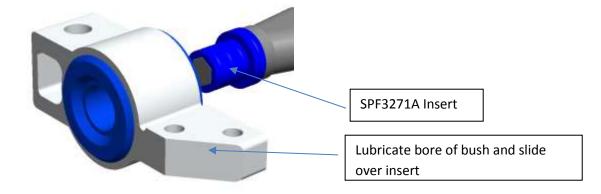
Push insert onto arm making sure it bottoms out on the peg of the arm (Left Hand Shown)
